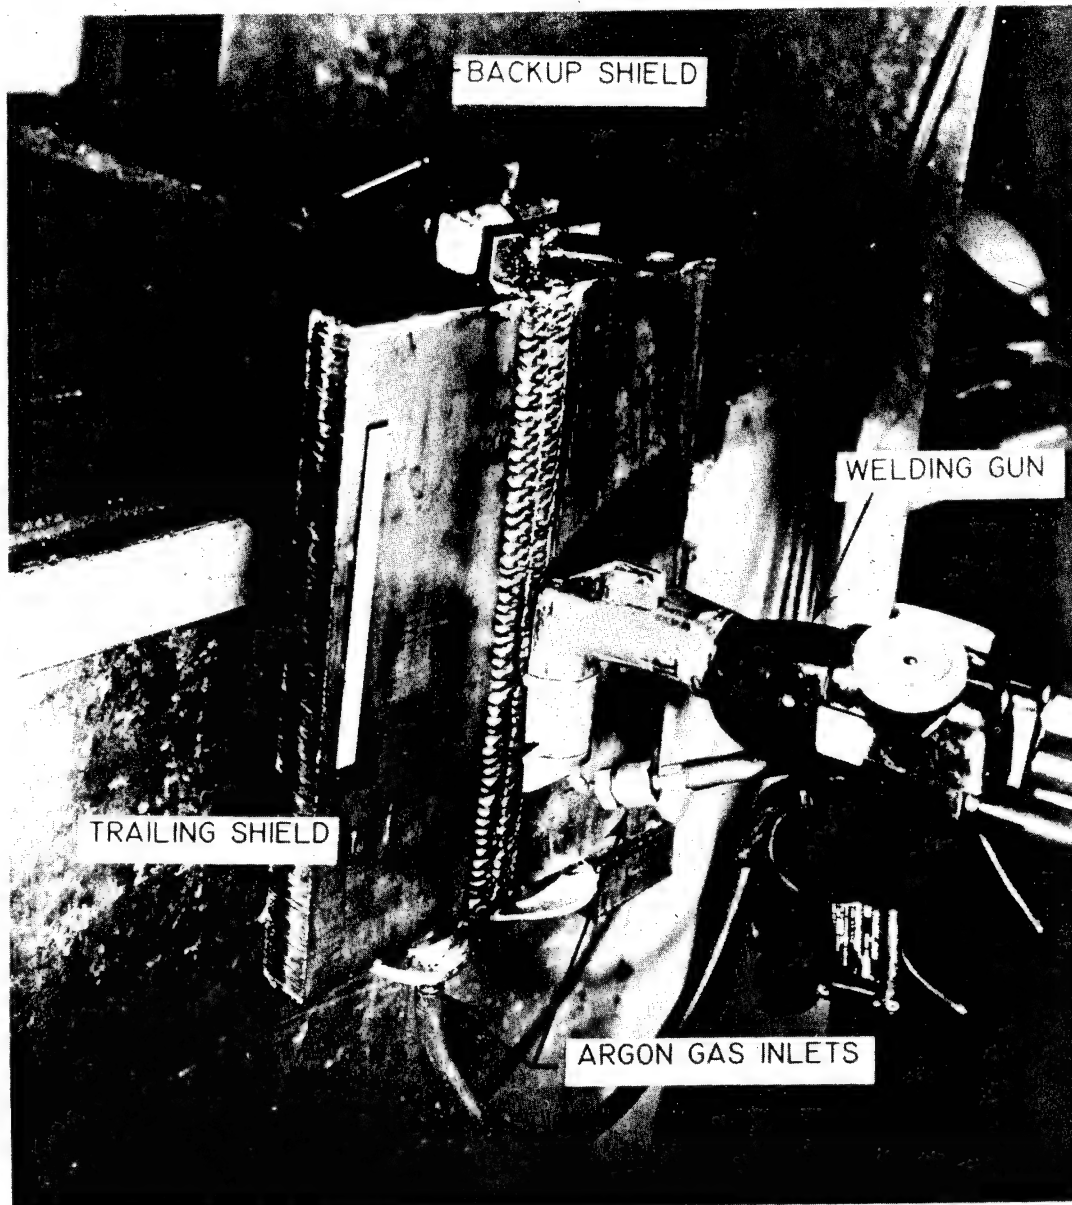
OUT-OF-CHAMBER WELDING OF ALLOY TITANIUM
